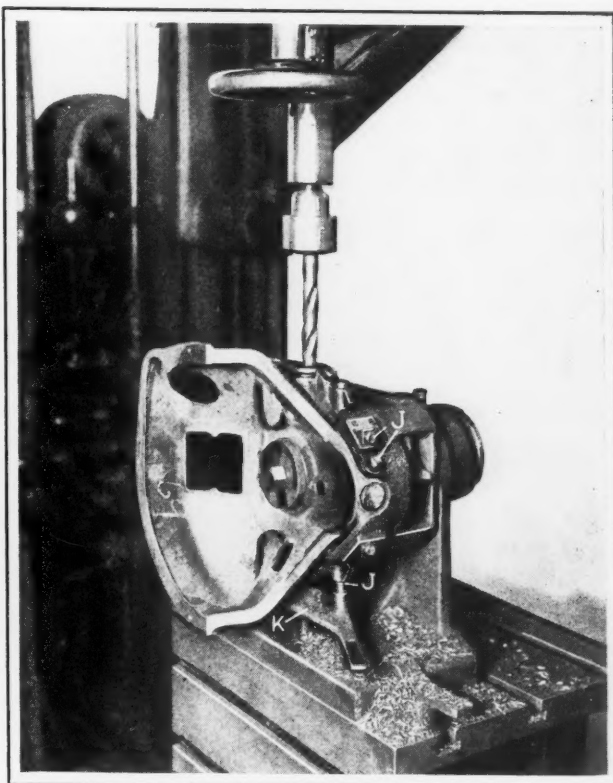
Rotary Jig used in Connection with Various Tools which are changed Twelve Times for machining Holes in the Case
